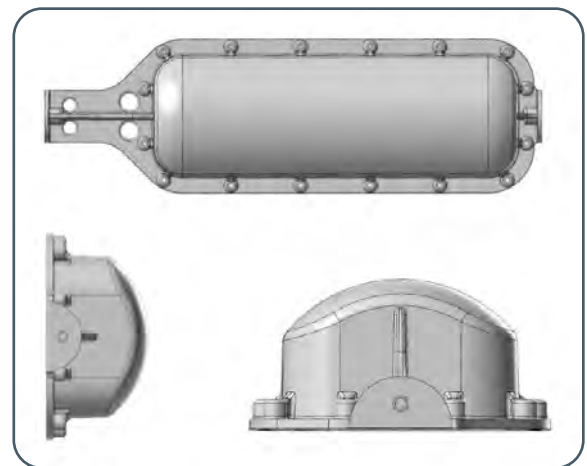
Internal enclosure: the top, front, and rear view of the internal enclosure with the self-tapping screw holes visible
